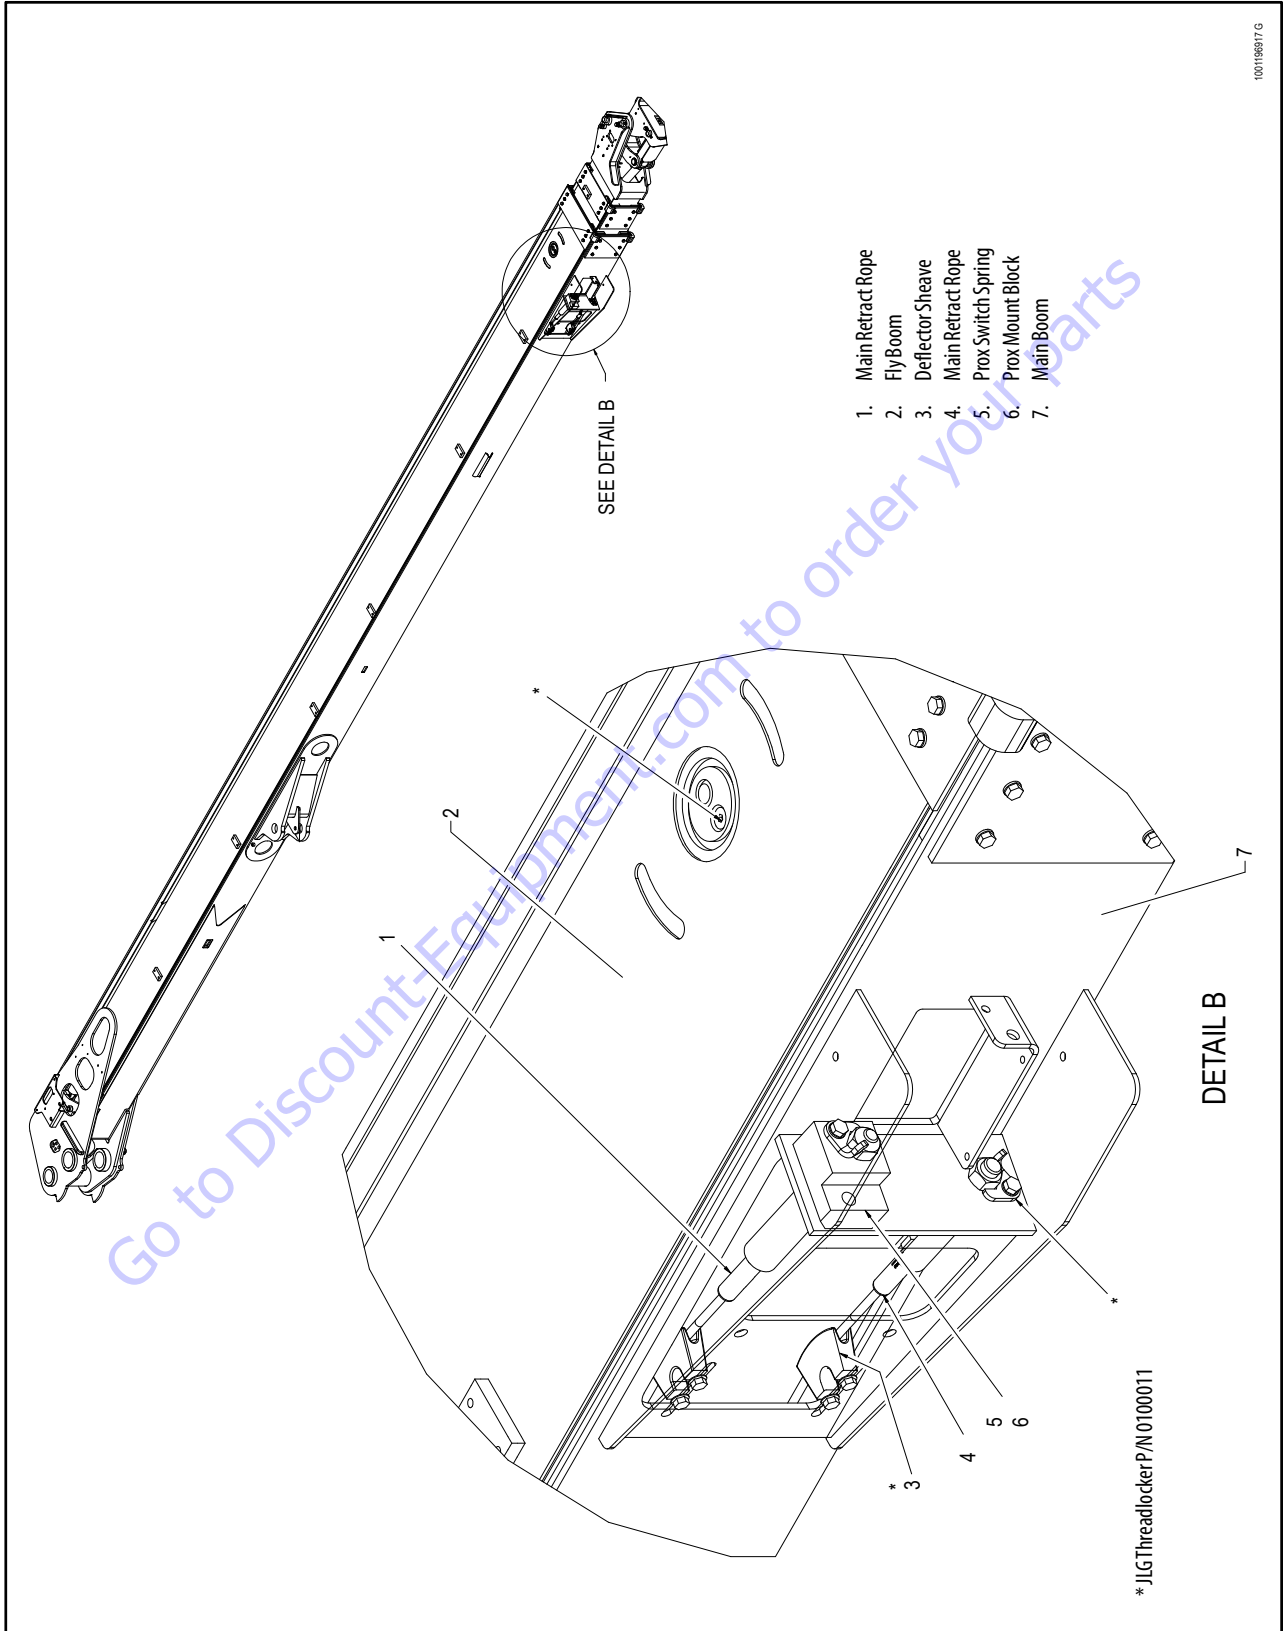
Main Boom Assembly - Sheet 3 of 7
